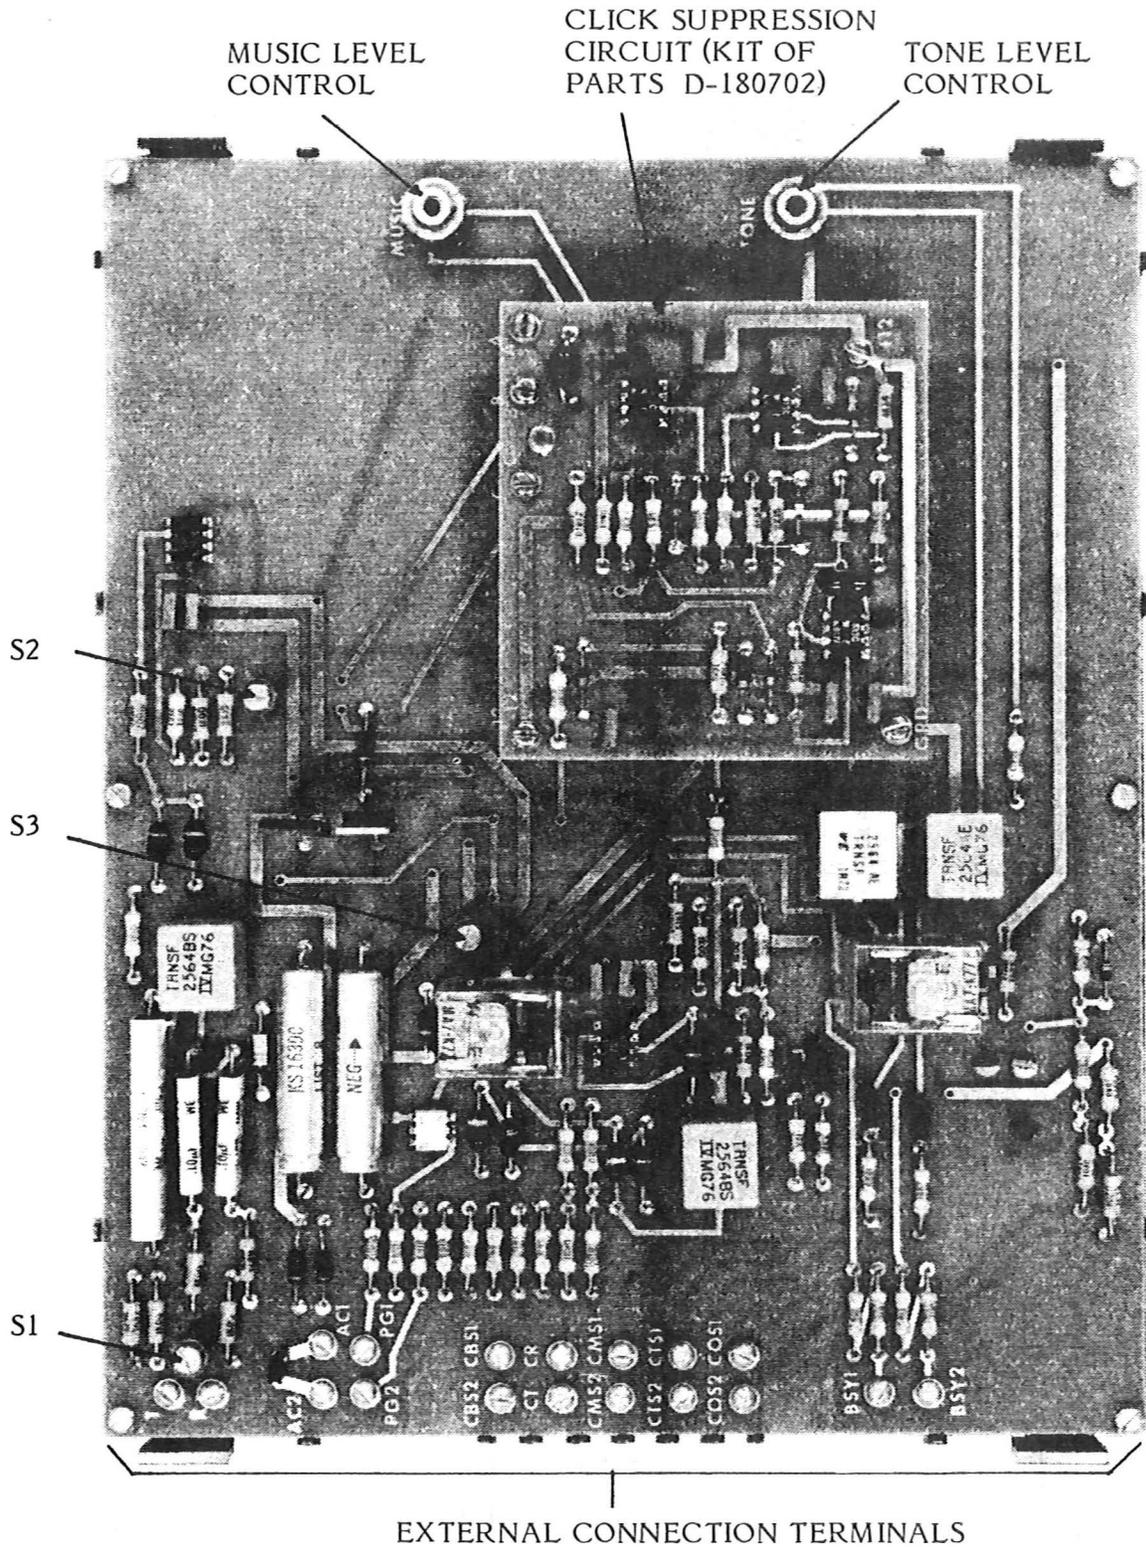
89A Control Unit, Mounted With Cover Removed
